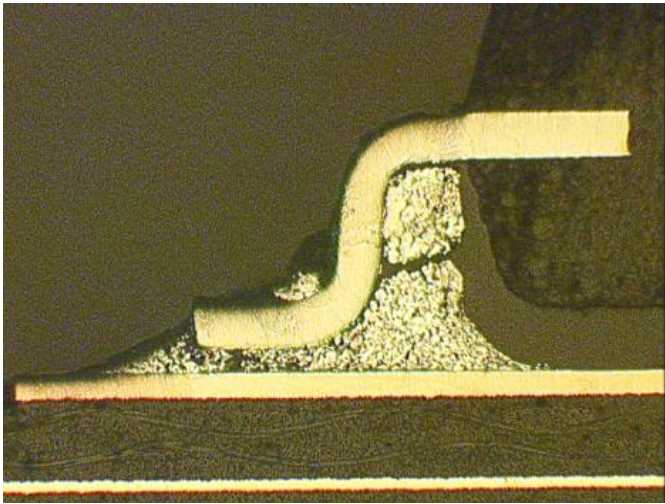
TSOP-50 Solder Joints, Board 8, Component U29, SnPb/SnBi, Failed @ 1424 Cycles
